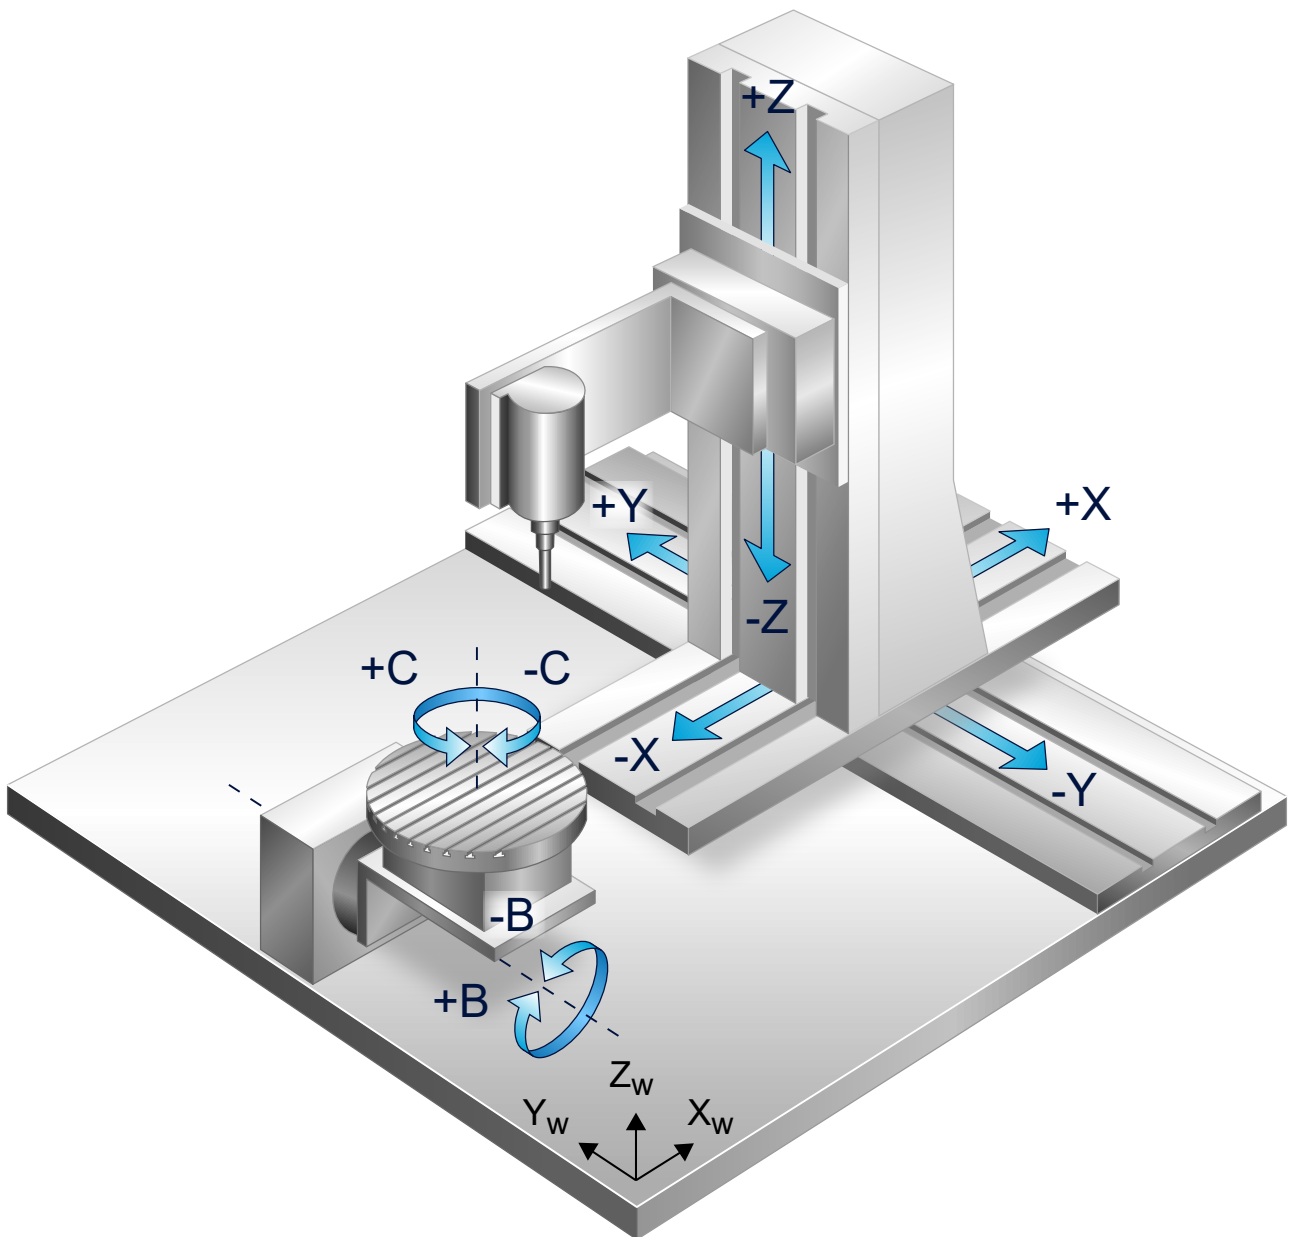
Kinematics of 5-axis machine with BC workpiece table
